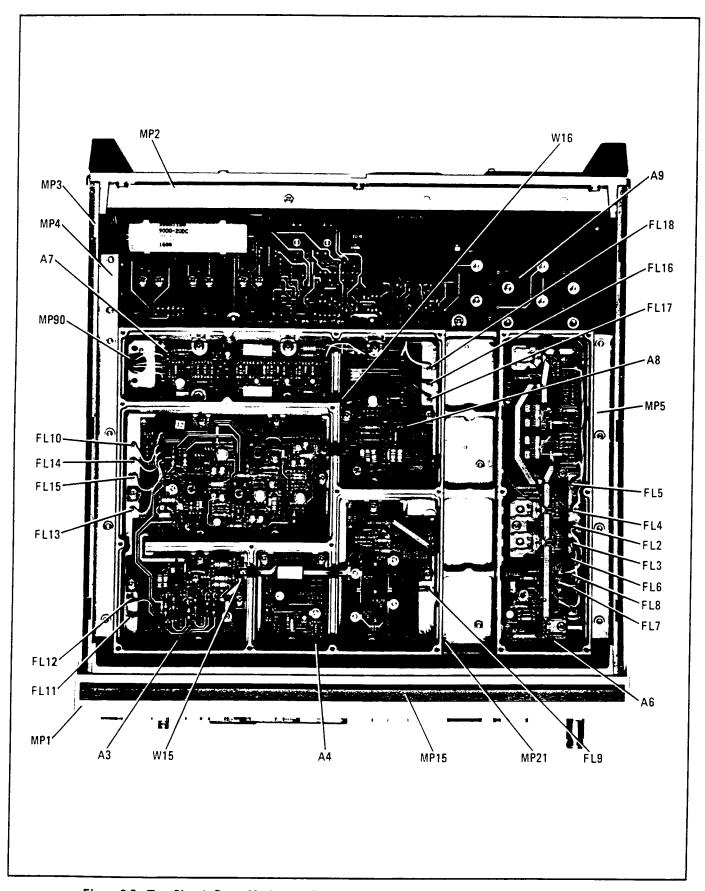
Top Chassis Parts, Mechanical Parts, and Cable Identification (with RF covers removed)
